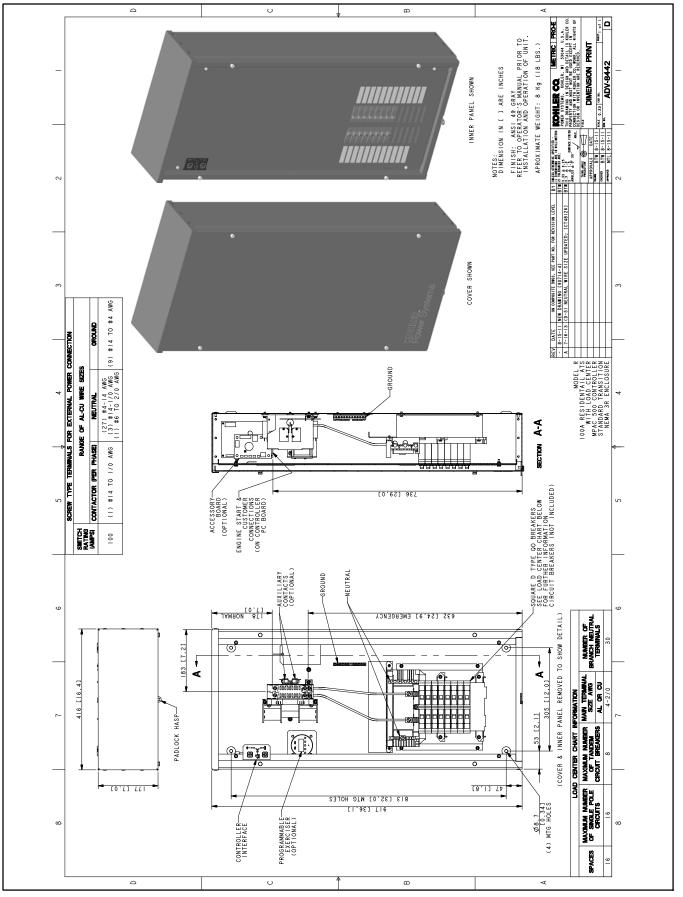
Dimension Drawing, 100 Amp NEMA Type 3R Enclosure with Load Center, ADV-8442
